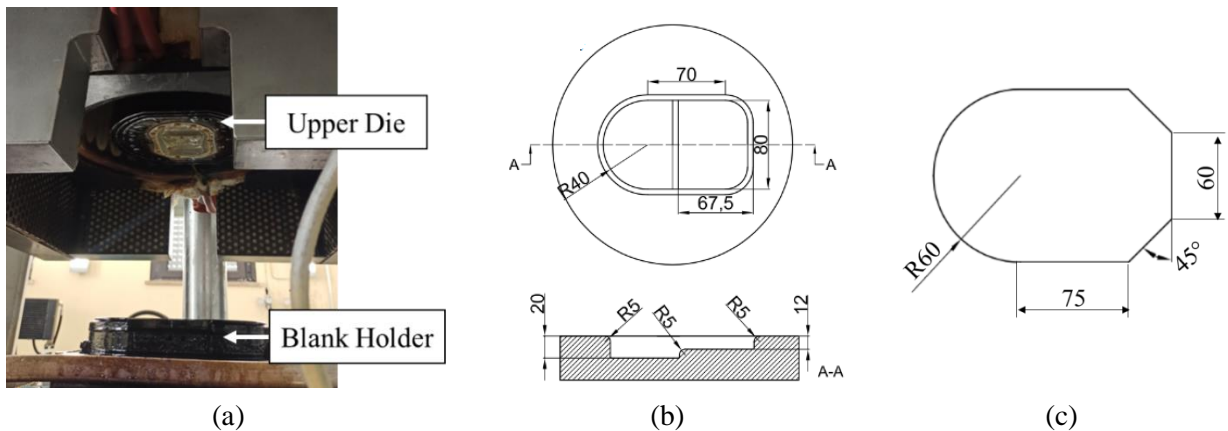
(a) Equipment used for the experimental HF tests; (b) Geometrical features of the case study; (c) Optimized initial blank geometry
